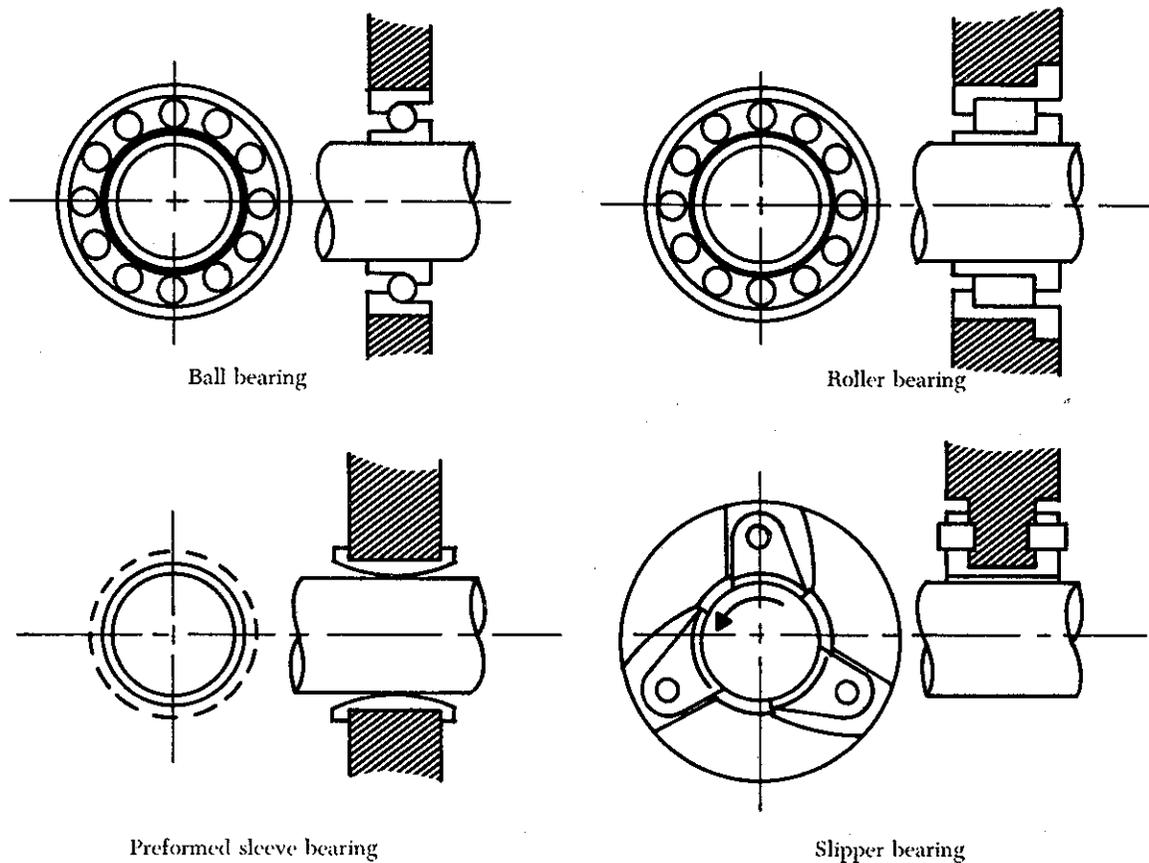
Type of main bearings used for gas turbine rotor support.
